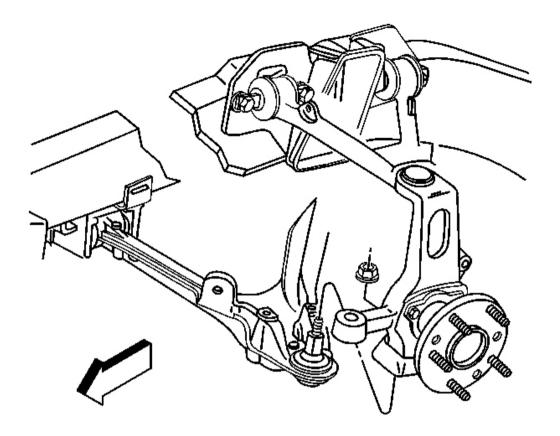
Lower Control Arm Ball Joint, Stud & Nuts Courtesy of GENERAL MOTORS CORP.
